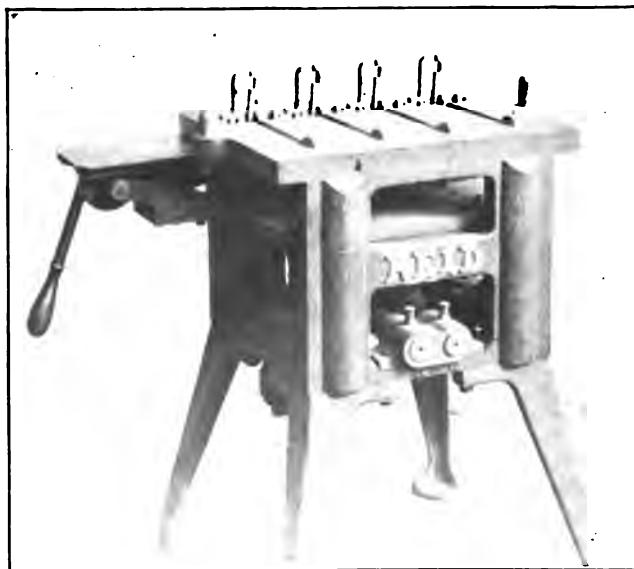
Pattern Expanded Ready to Be Drawn through the Stripping Plate
